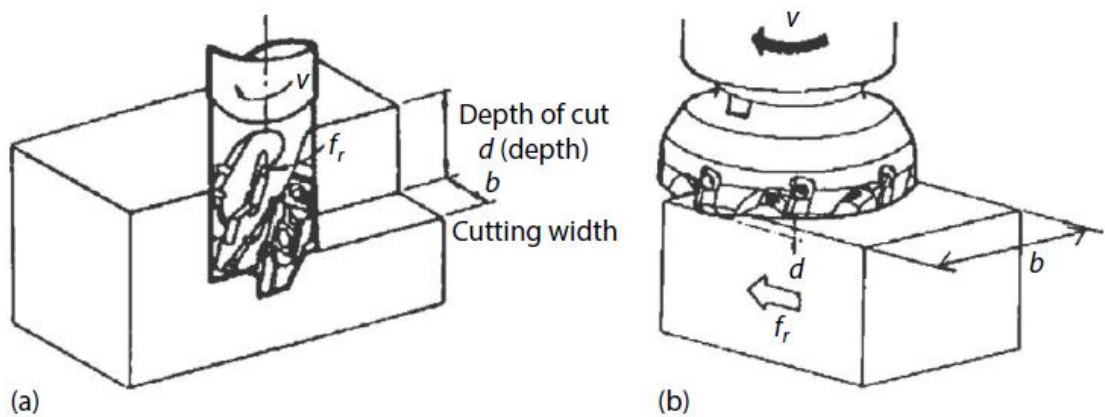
Types of milling operations: (a) end milling, (b) face milling (Lee et al., 2020)
